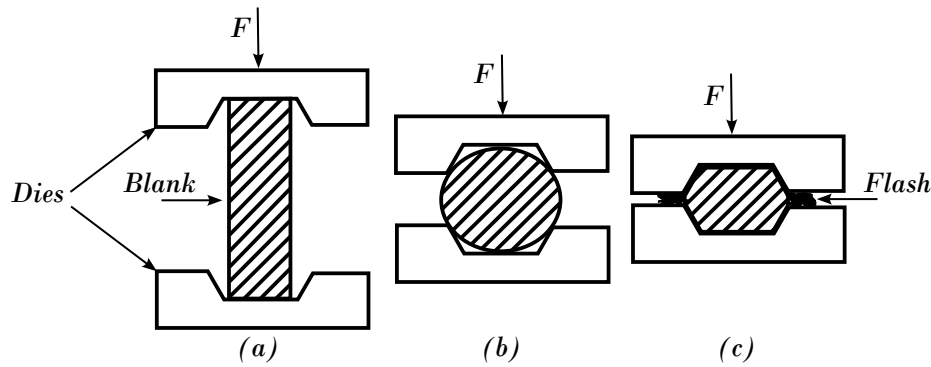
Impression-die forging process, (a) Forging start, (b) Forging in process, (c) Forging finish, adapted from Chandrasekaran *et al.* [124].
